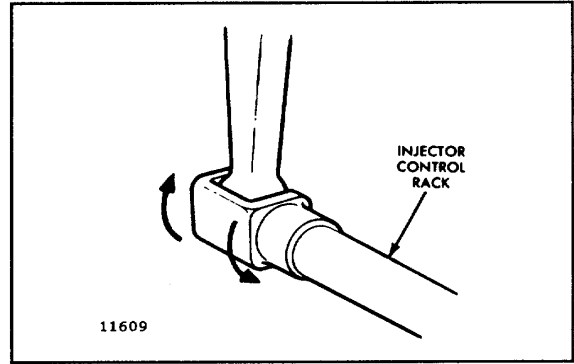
Checking Rotating Movement of Injector Control Rack
